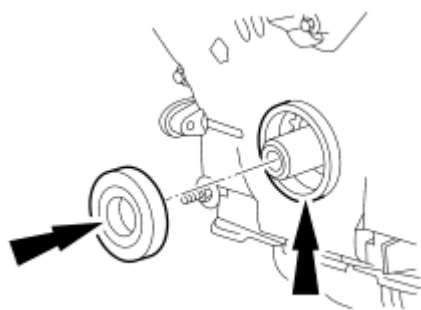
Removing Crankshaft Front Seal Using Special Tool
